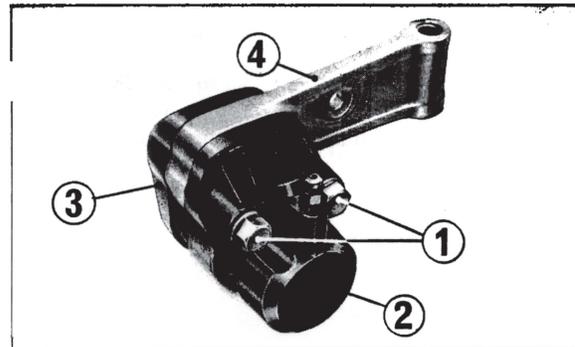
(1) Caliper securing bolt (2) Caliper A
